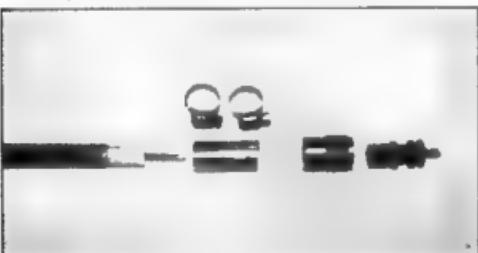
Prepared Cable End with adapter sleeve , two hose clamps and connector ready for assembly.
